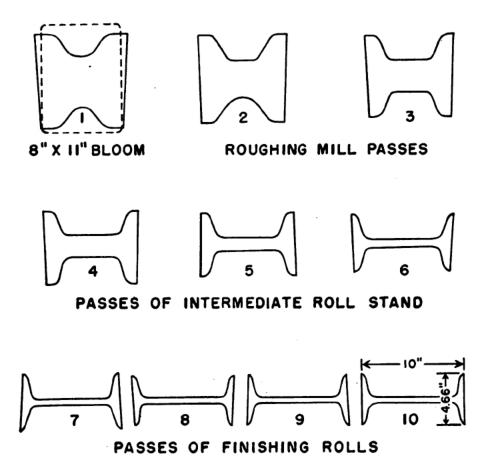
Typical roll passes in forming a ten inch 1-beam.
